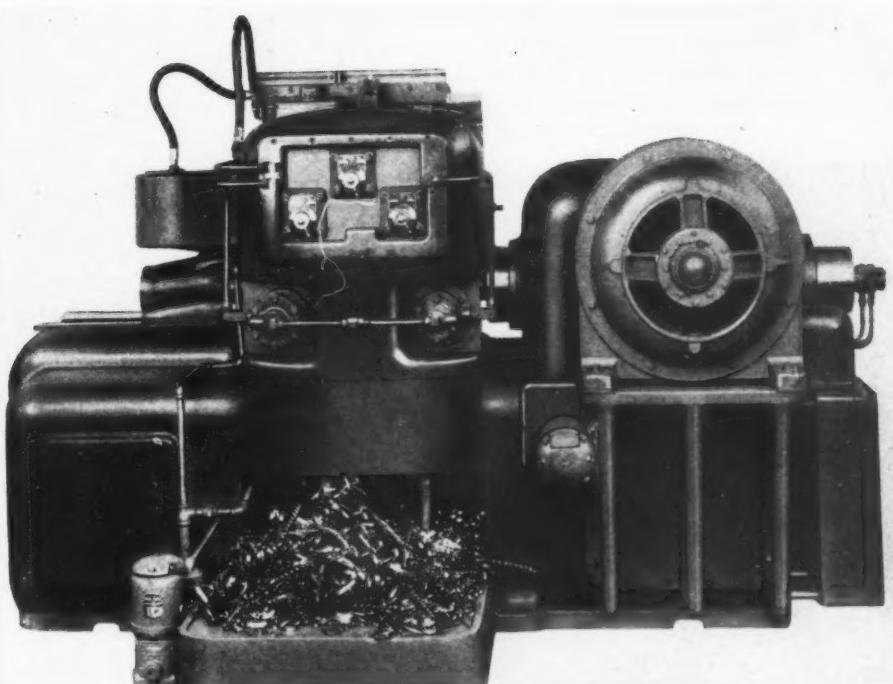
End view shows mounting of tailstock and horizontal cylinder and slide for end facing tool
